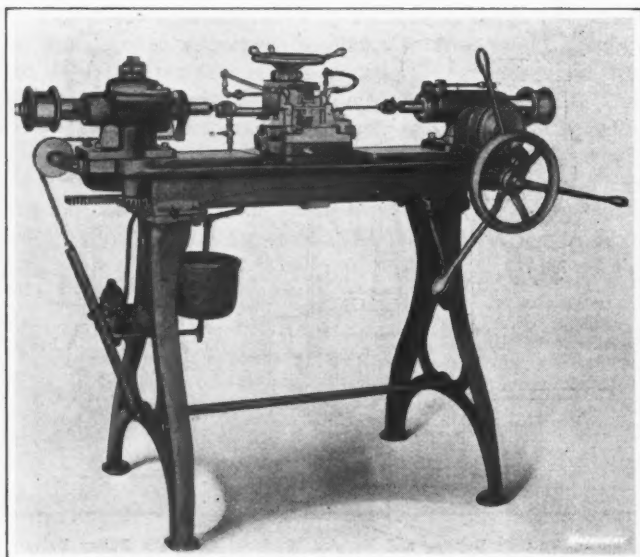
Langelier Two-spindle Horizontal Turnbuckle Drilling Machine
